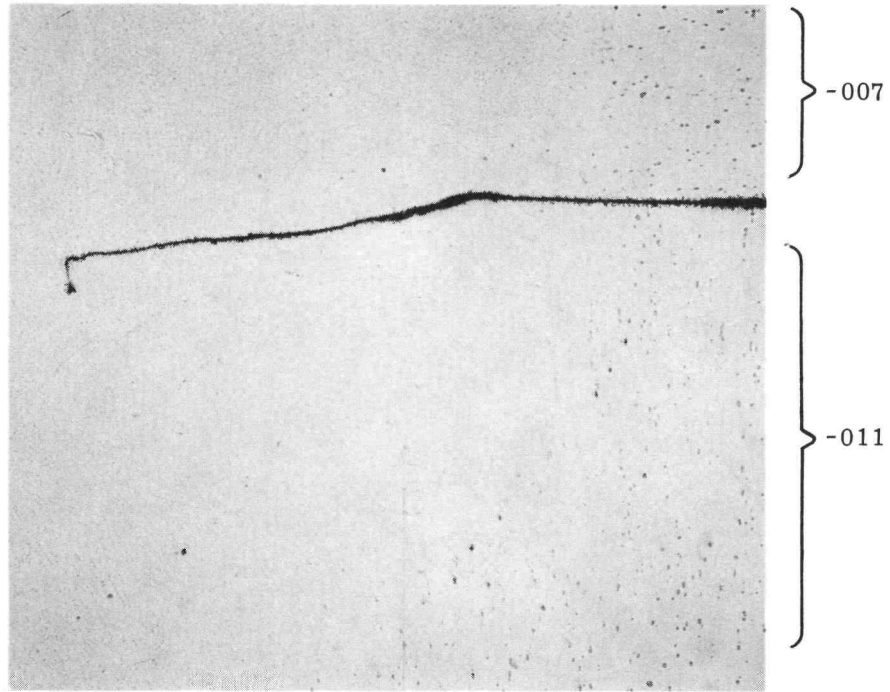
TIG WELD BEAD SHOWING INCOMPLETE FUSION IN SPECIMEN 1; MAGN 64X
